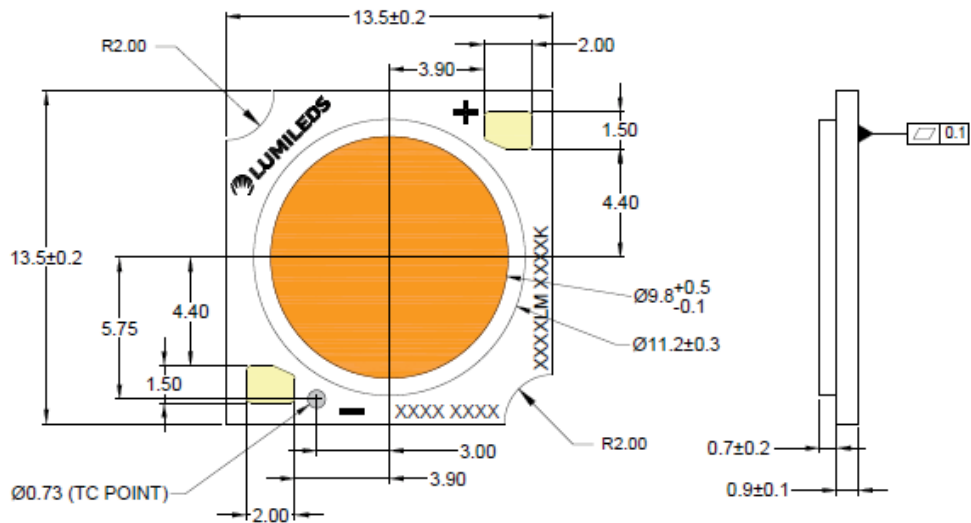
Mechanical dimensions for L2C6-xxxxxL02x0900, L2C6-xxxxxL03x0900 and L2C6-xxxxxL04x0900.
